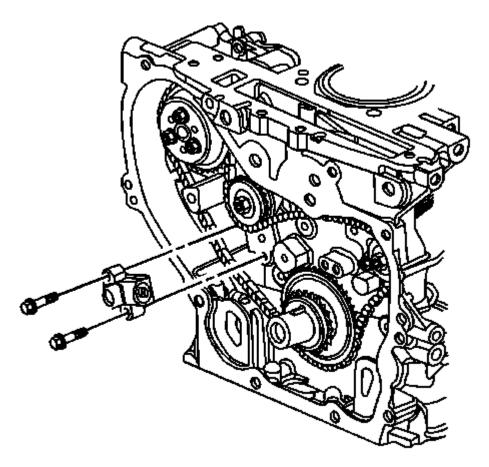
Timing Chain Retention Tool On Exhaust Side Courtesy of GENERAL MOTORS COMPANY
